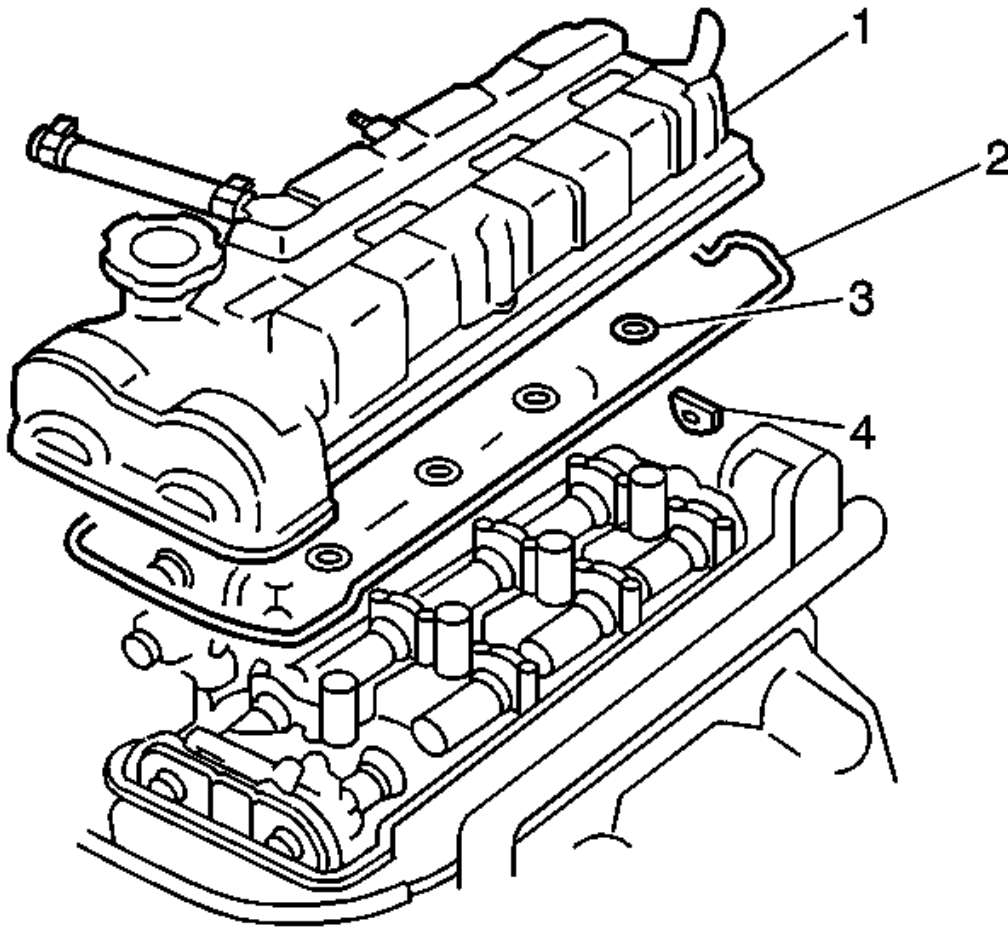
View Of Cylinder Head Cover, Gasket & O-Rings
